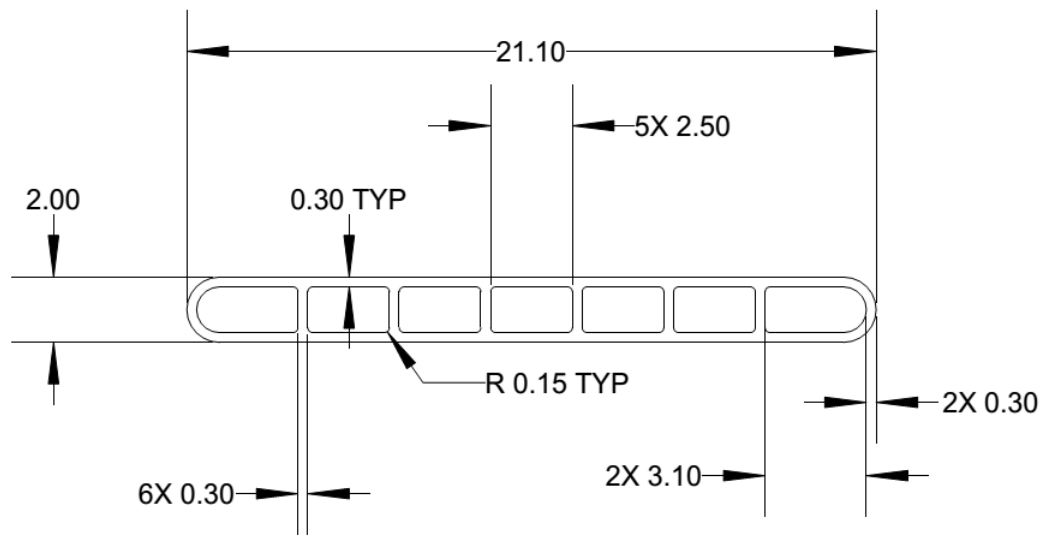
Copper minichannel tube design #2. Dimensions in millimeters.
